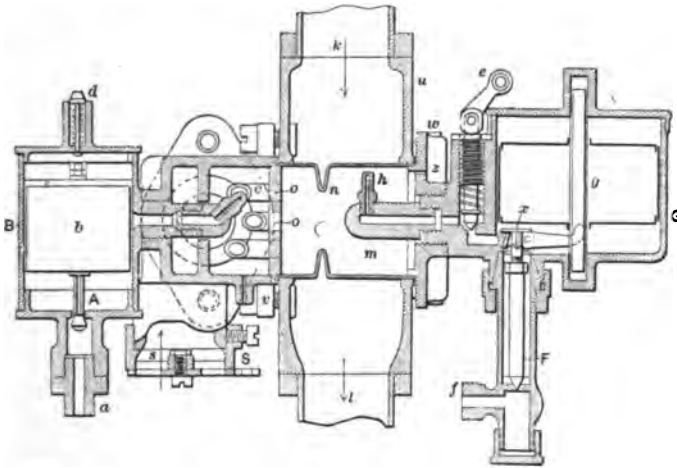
Vertical section of Claudel carburetor for heavy oils.
